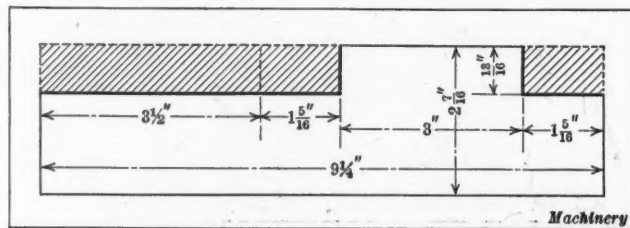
Turret Revolving Pawl Block on which Milling Operations are performed by Machines shown in Figs. 11 and 12
